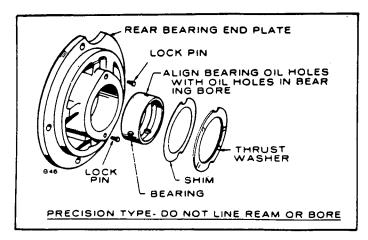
BEARINGS FOR REAR BEARING PLATE
